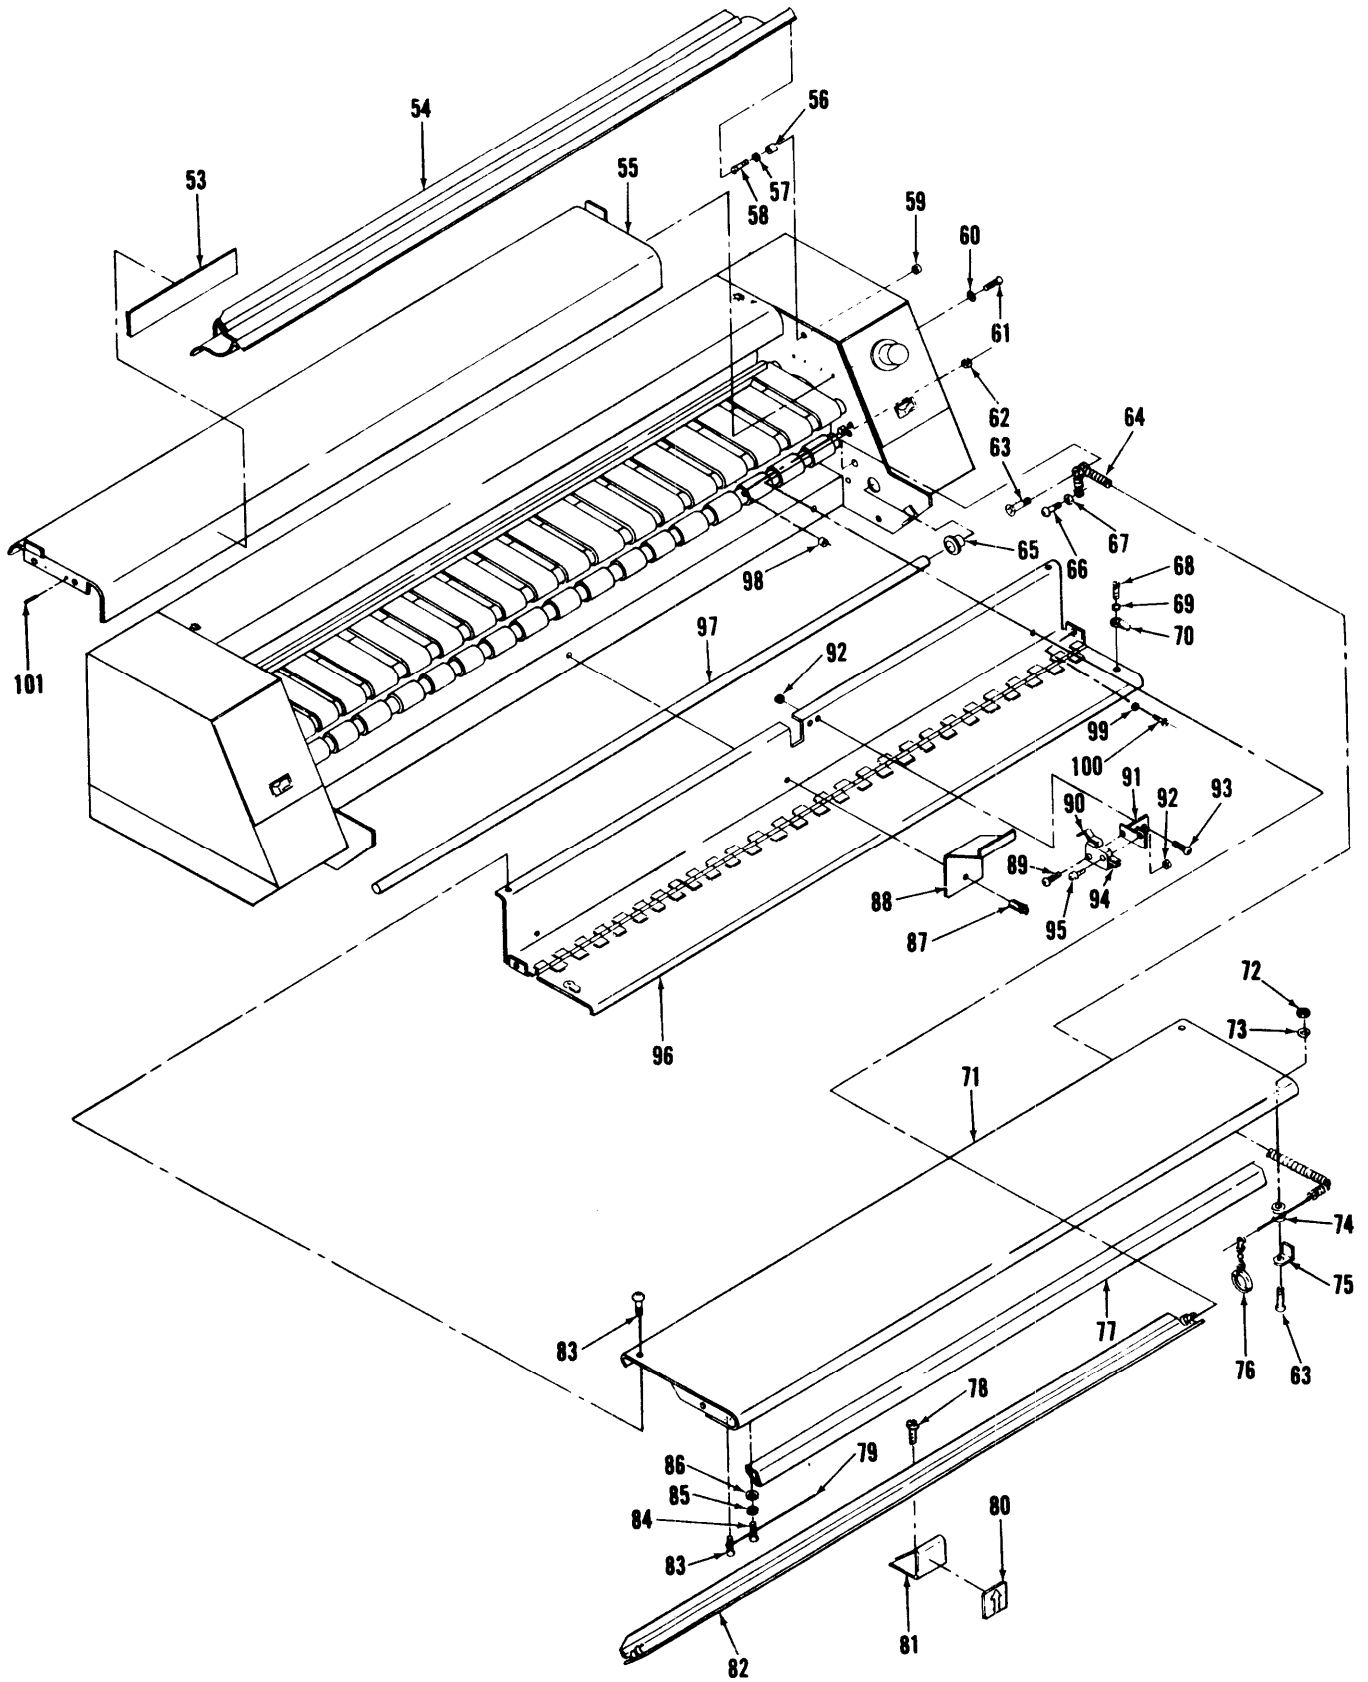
Machine Cabinet Group (Sheet 3 of 4)
